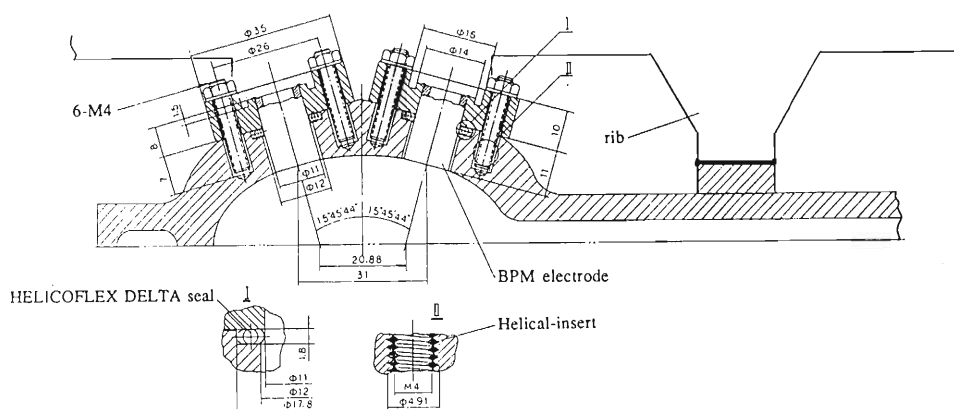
Cross-sectional view of the SSC assembled BPM.
